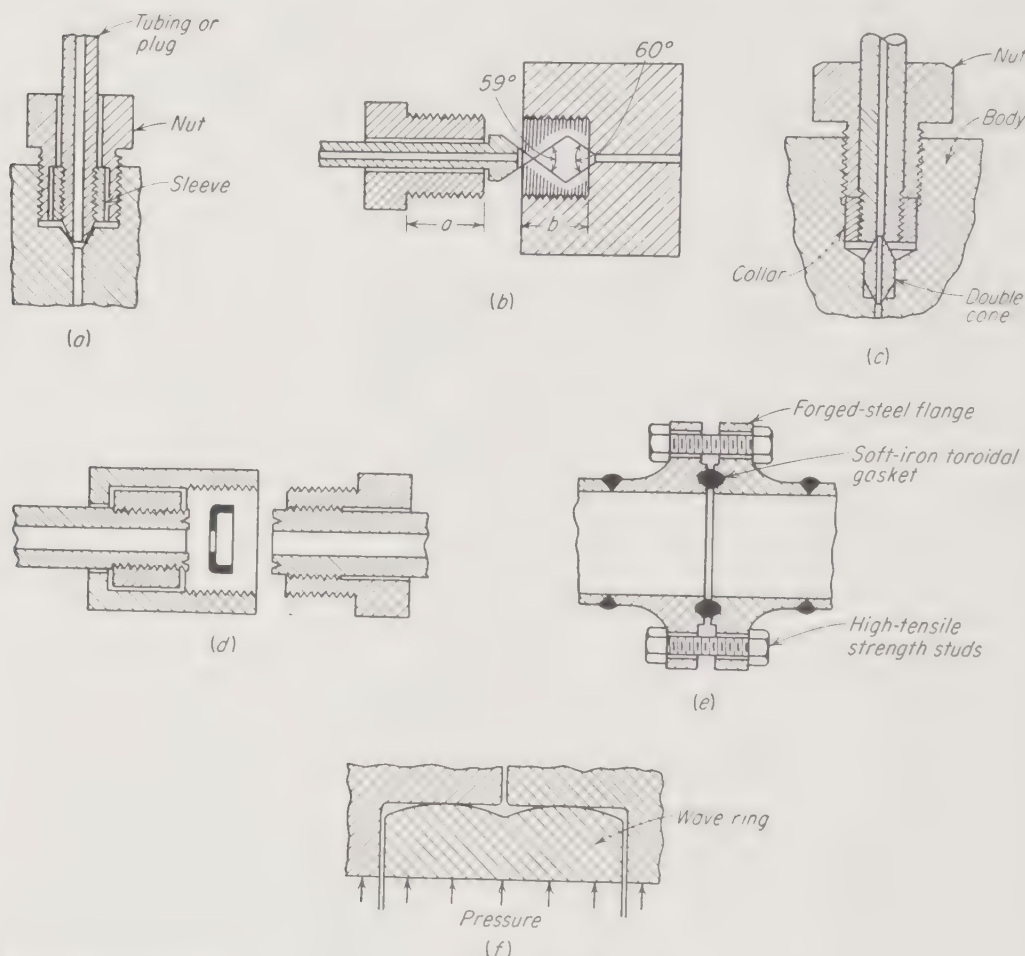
Connections. (a) Cone turned on end of tube. (b) Cone joint. (c) Double-cone joint. (D. H. Newhall.) (d) Pressure joint. (e) Ring joint for large tubes. (f) Wave-ring pressure joint.
